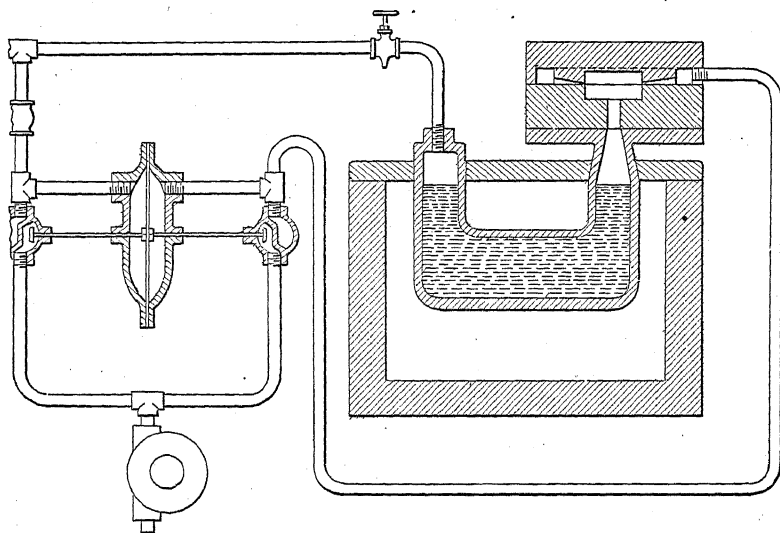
DIE-CASTING MACHINE WITH VACUUM APPLIED DIRECTLY TO DIE.
